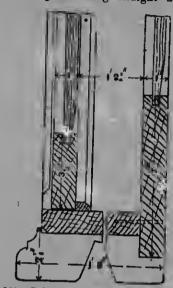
Enlarged Vertical Section through Bottom Part of Sideboard.
